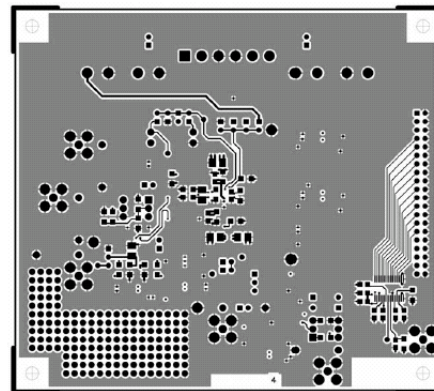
TSSOP Evaluation Board Layout, Secondary Side
